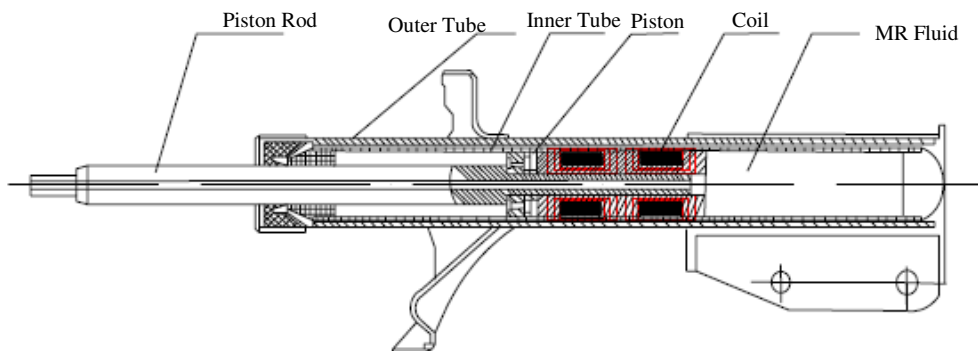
Schematic configuration of the twin tube MR damper without accumulator [26]
